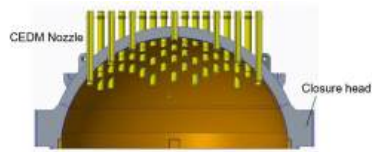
Cross section and mounted drawing of CEDM nozzle on the head for reactor vessel
